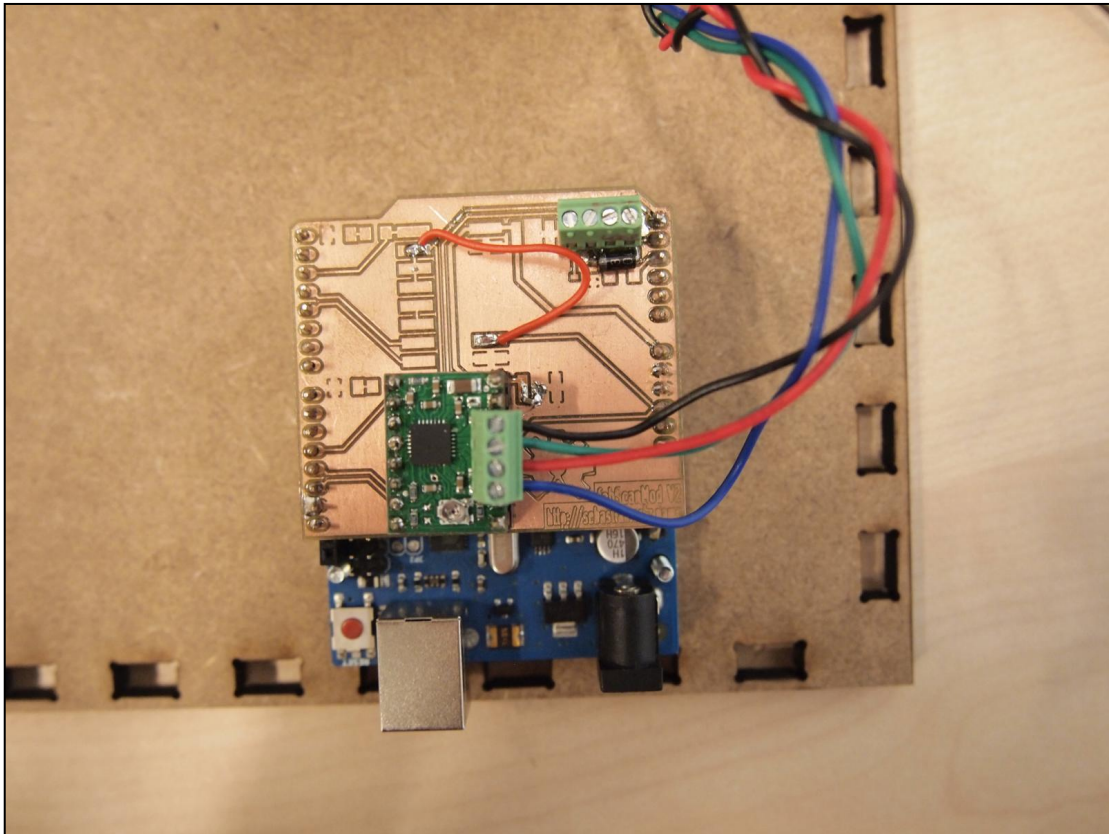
Connect the stepper motor cable with the Fabscan shield.
